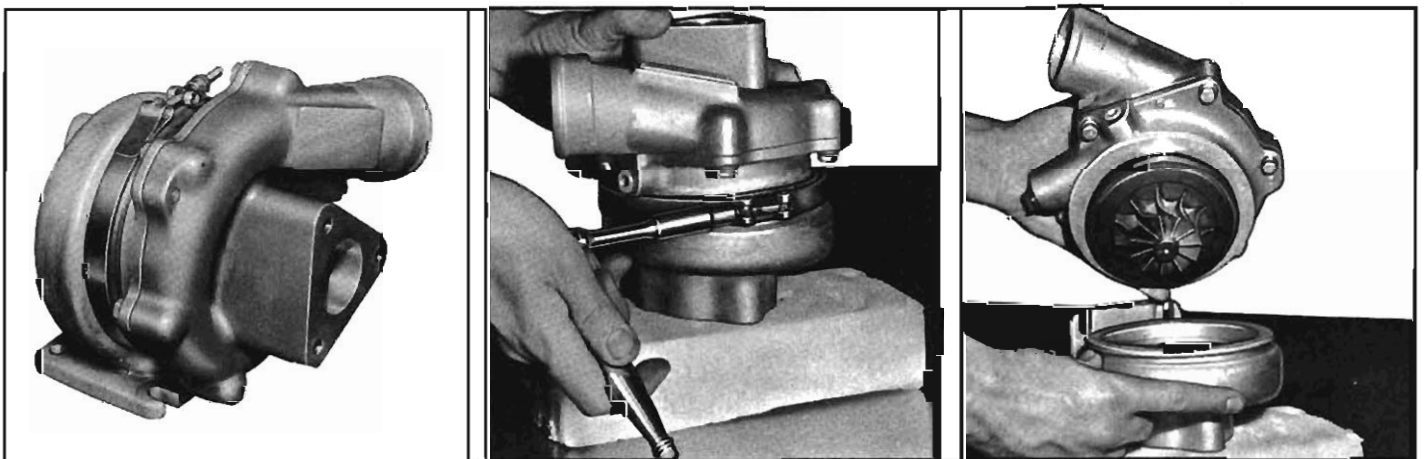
Removal of the Turbine Housing for Installation of Replacement Supercharger
